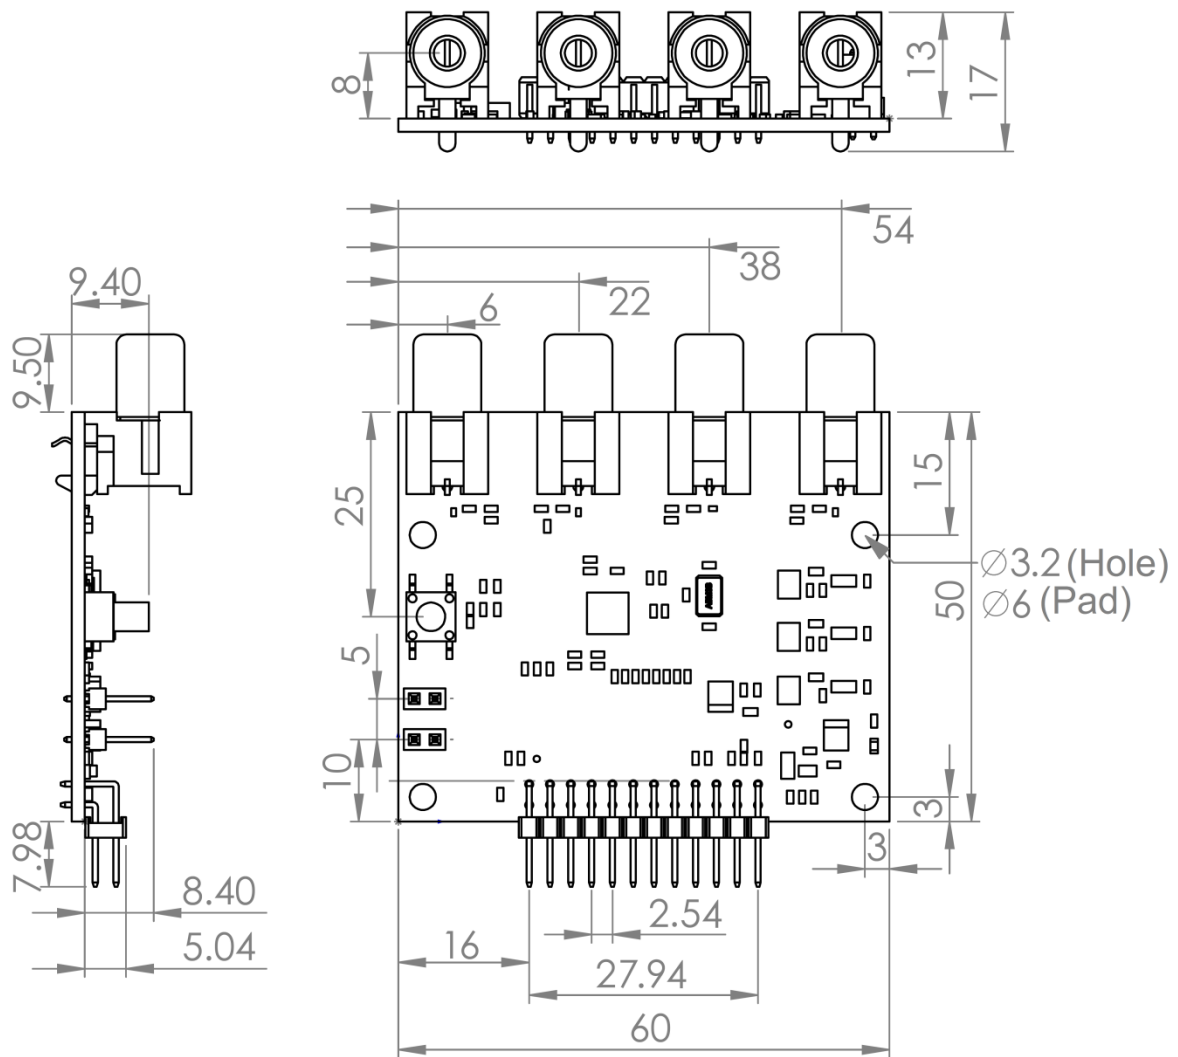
ACA Dimensions – Top Side, all dimensions are in millimetres (mm)
